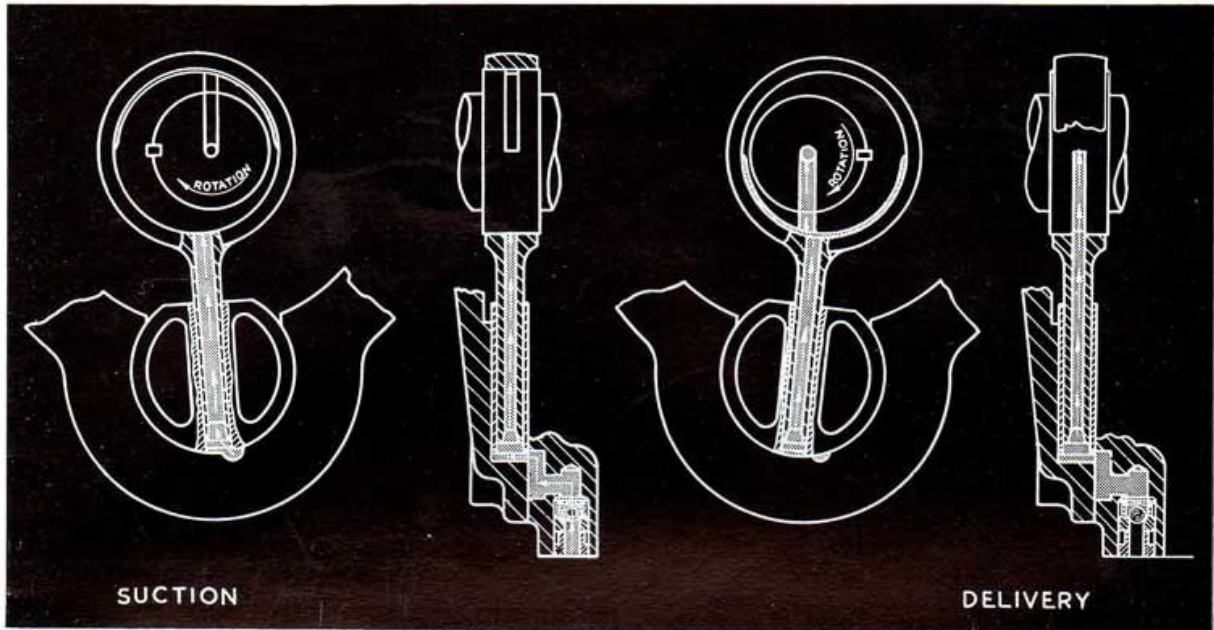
GEARBOX OUTPUT OIL PUMP (PLUNGER TYPE).
